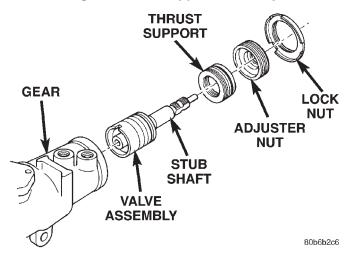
Valve Assembly With Stub Shaft ASSEMBLY
